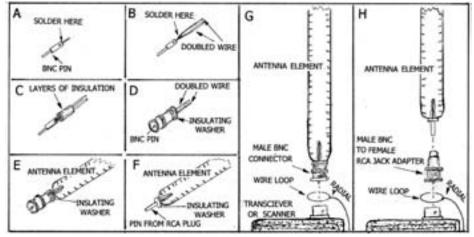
SOLDERING WIRE INTO BNC PIN (A), SOLDERING DOUBLED WIRE ONTO PIN WIRE (B), INSULATING WIRES (C), ASSEMBLED MALE BNC WITH INSULATING WASHER (D), ANTENNA ELEMENT ADDED TO BNC CONNECTOR (E), RCA PIN WITH INSULATING WASHER ADDED TO ANTENNA ELEMENT (F), CONNECTING ANTENNA AND RADIAL (G & H).
